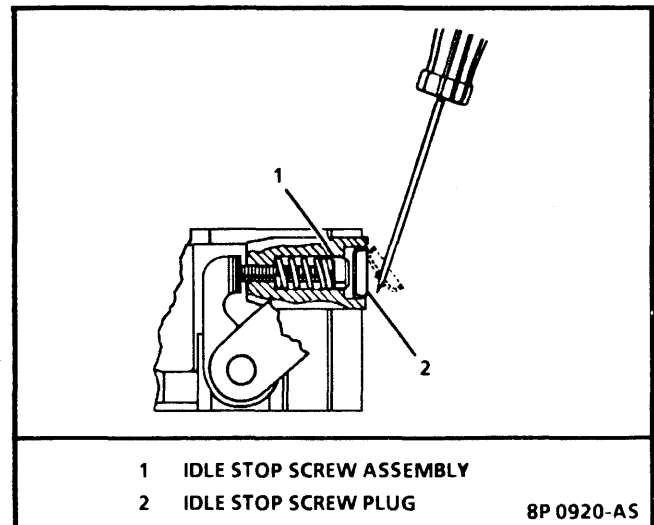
A-10 - Removing Stop Screw Plug (7.4L)
